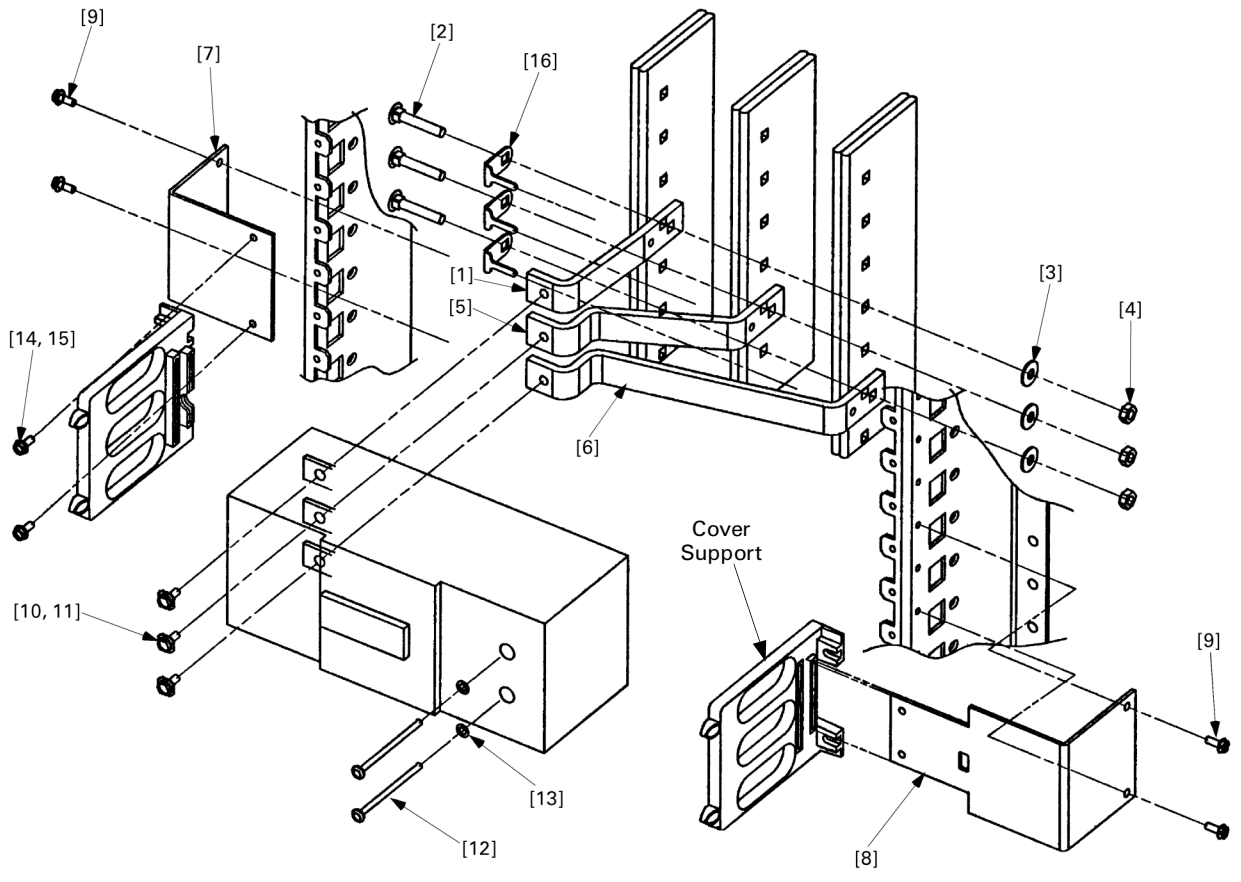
Single bolt-on circuit breaker assembly, exploded view.
